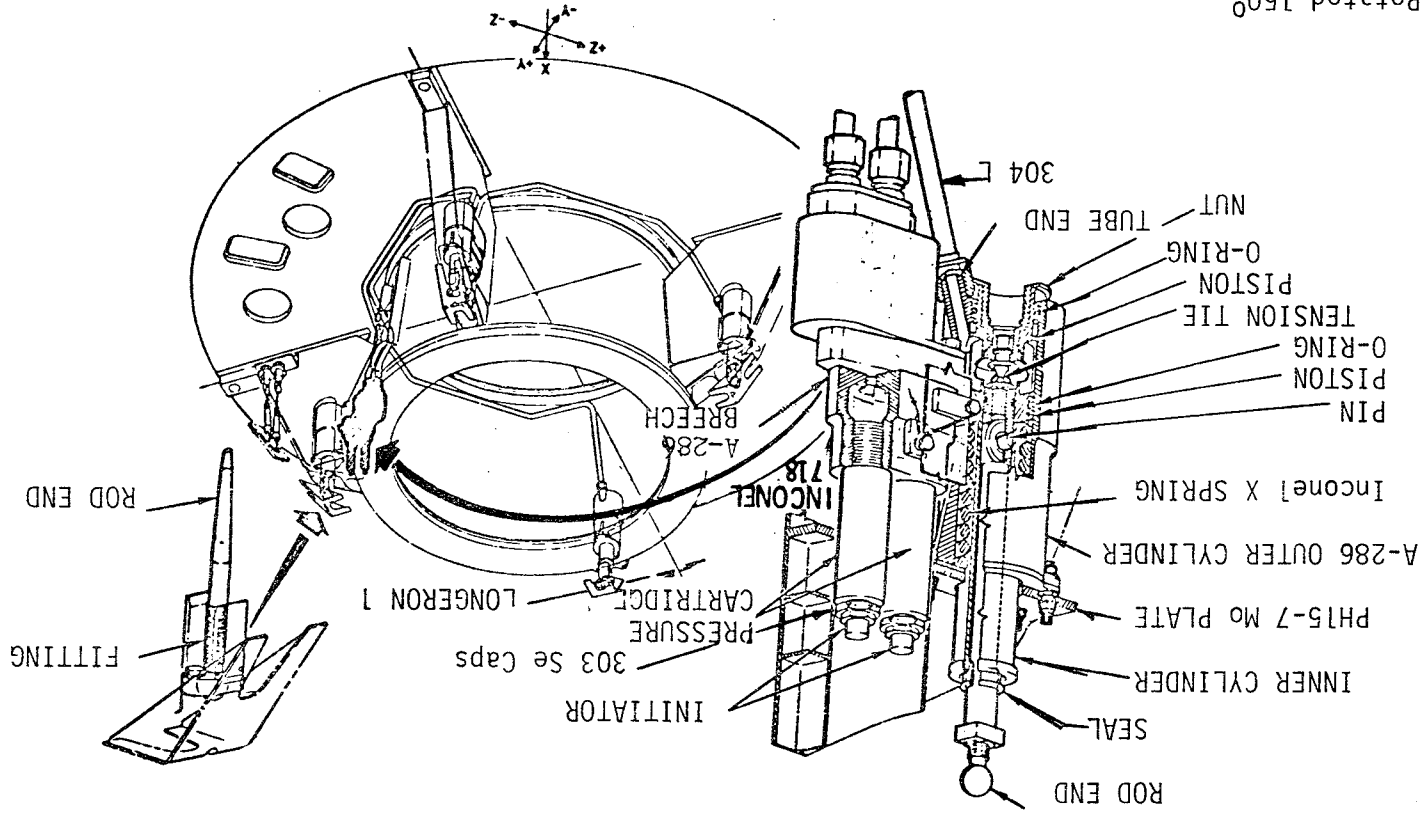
THRUSTER ASSEMBLY MATERIAL USAGE
